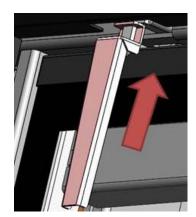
Insert the tool in the catch to open the door to clean the glass
